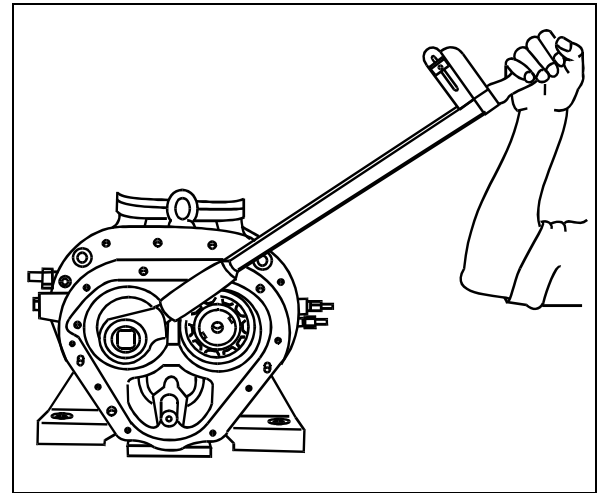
Tightening the grooved nut (23) of the axial bearings using grooved nut wrench T5
